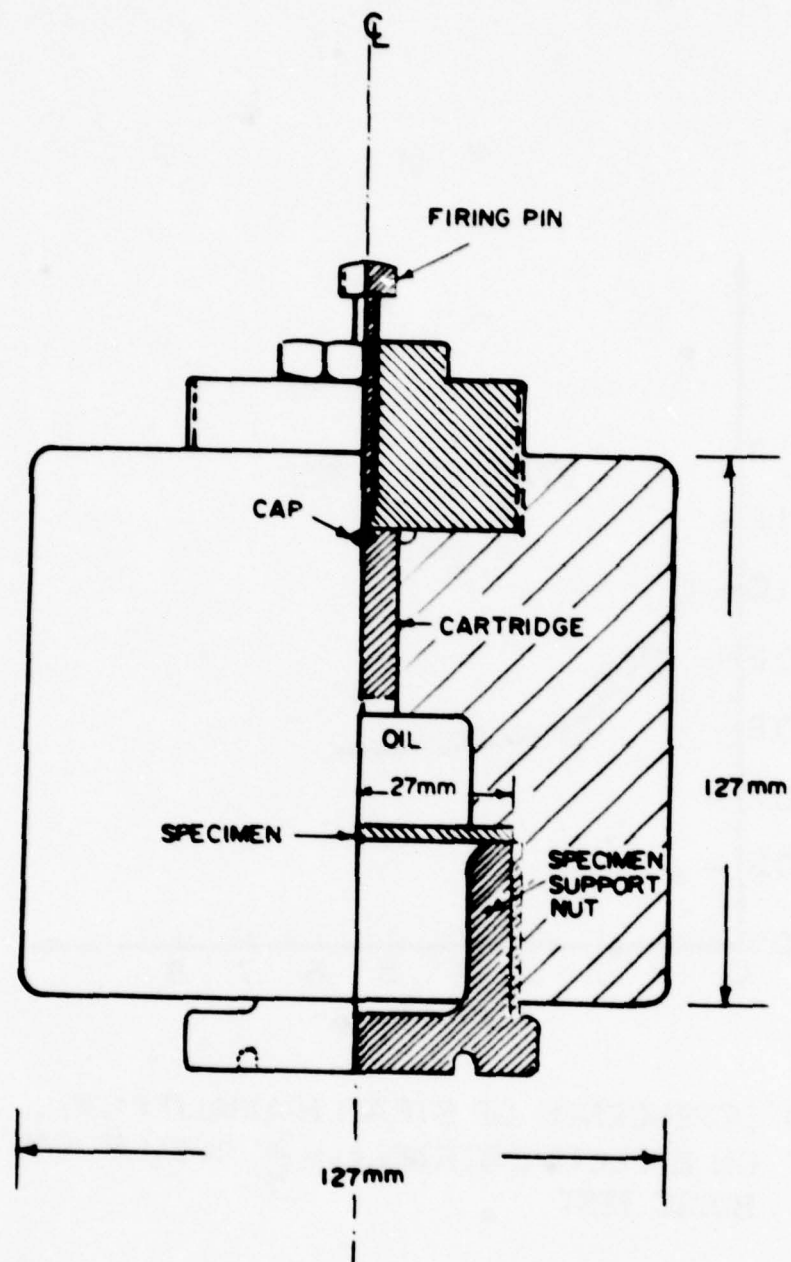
EXPLOSIVE BULGE TEST APPARATUS
